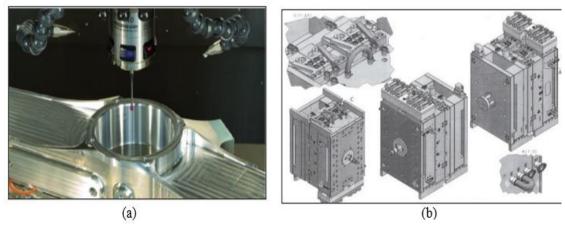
(a) Inspection of components linked to the machining center through CAM. (b) Injection Mold Assembly.
